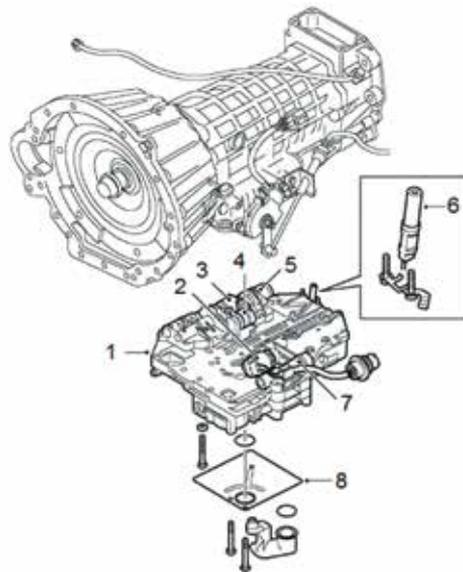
Electrohydraulic controller: 1 – valve block; 2 – pressure-regulating solenoid valve (MV 4); 3, 4 – gear-shift control solenoid valves (MV 2 and MV 1, respectively); 5 – lock-up clutch control solenoid valve (MV 3); 6 – output shaft speed sensor; 7 – manual control valve; 8 – suction filter of the hydraulic system [17]
